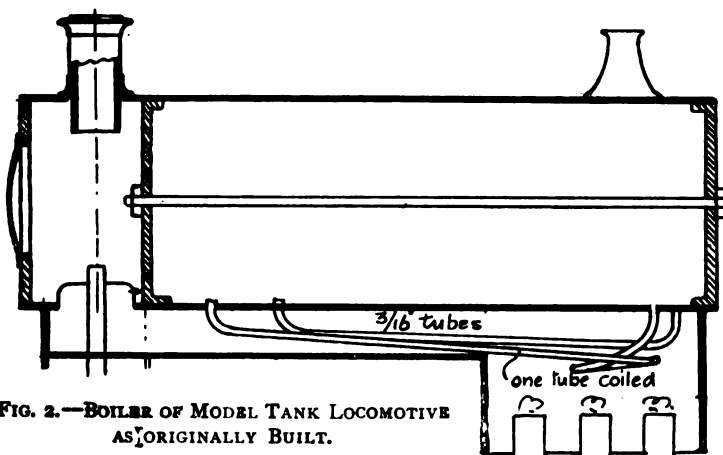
BOILER OF MODEL TANK LOCOMOTIVE
